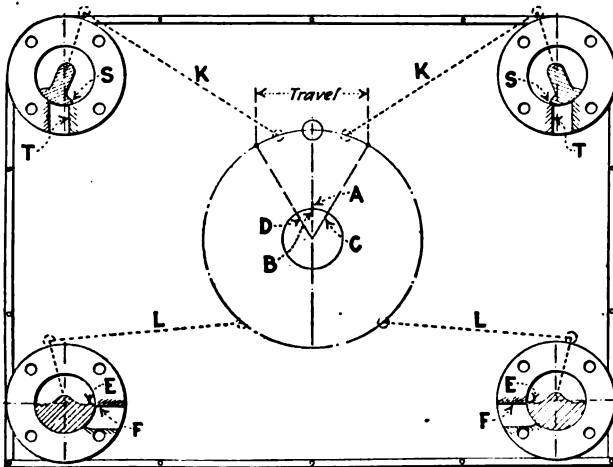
Back view of cylinder of Fig. 232 with valves shown in section.
